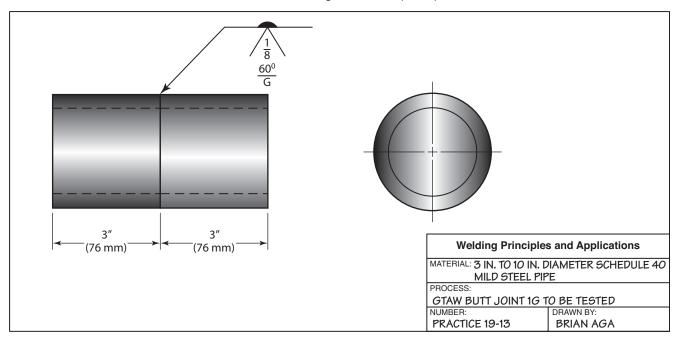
Practice 19-13 1G pipe weld to be tested.
